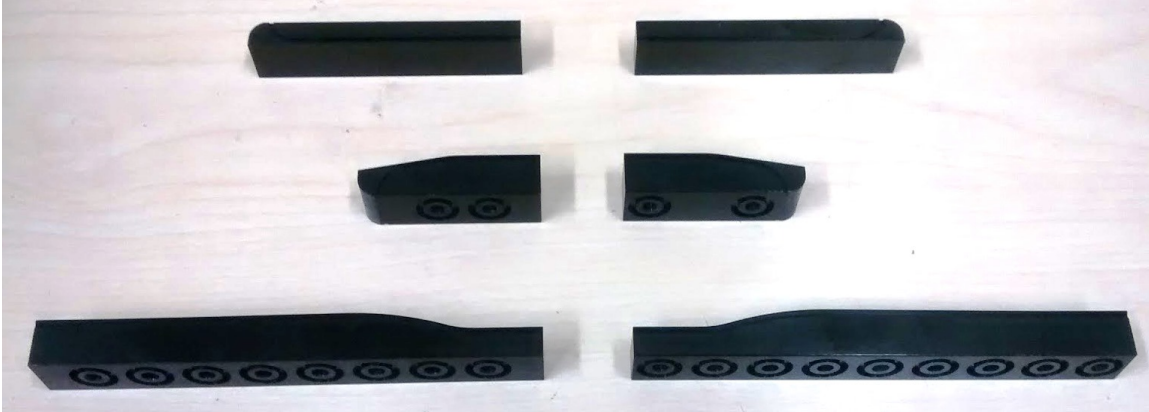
Second set of nozzle inserts manufactured for the test rig showing addition of o-ring groove along contour and black anodization to minimize reflected light
